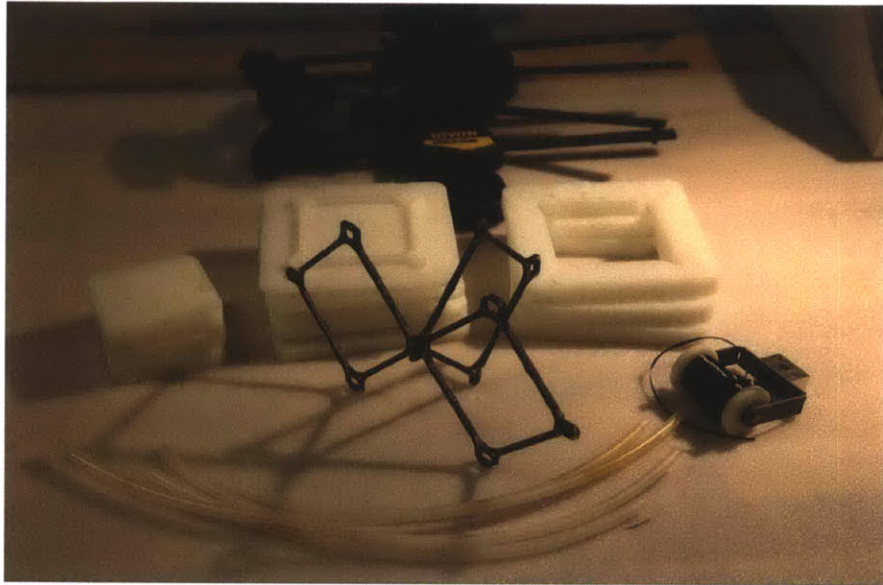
All parts of the process (back to front): clamps, three types of mold pieces, three identical sample composite parts from the mold assembled, automated winding attachment with 100 feet of 12k carbon fiber tow to the spool, and tubing used for resin transfer.
